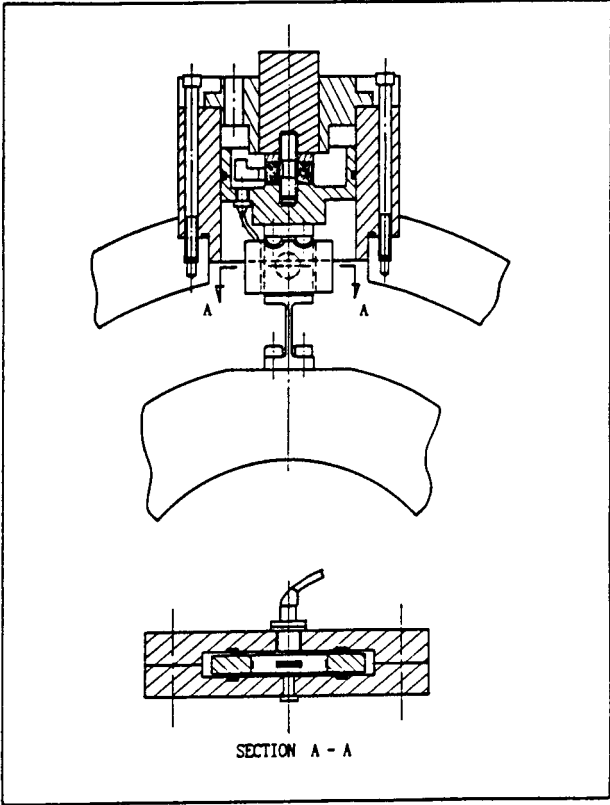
New load measuring system, showing complete assembly with water-seal barrier.
